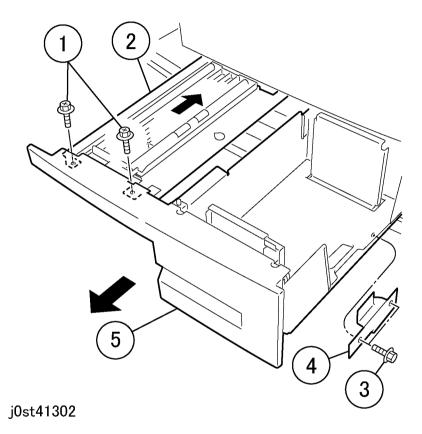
Removing the Tray 4 Assembly (j0st41302)
